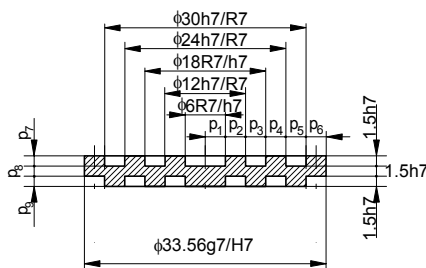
Characteristic plate dimensions Fig.4.7. Tool for manufacturing groove plates
